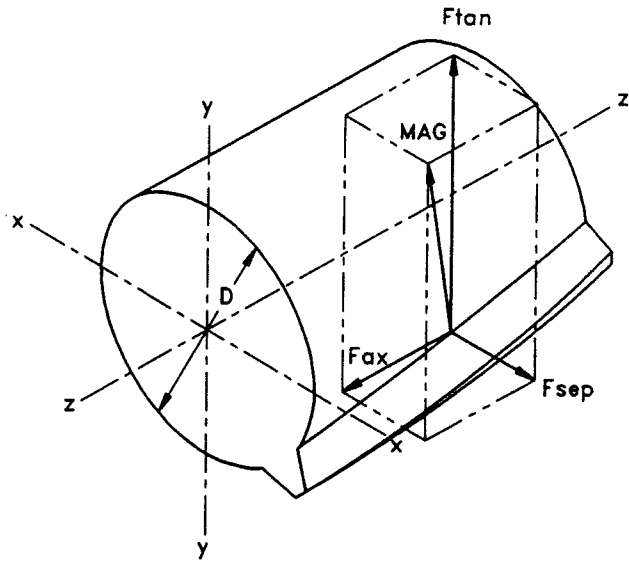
Transmitted Gear Load on Helical Gear Teeth.
